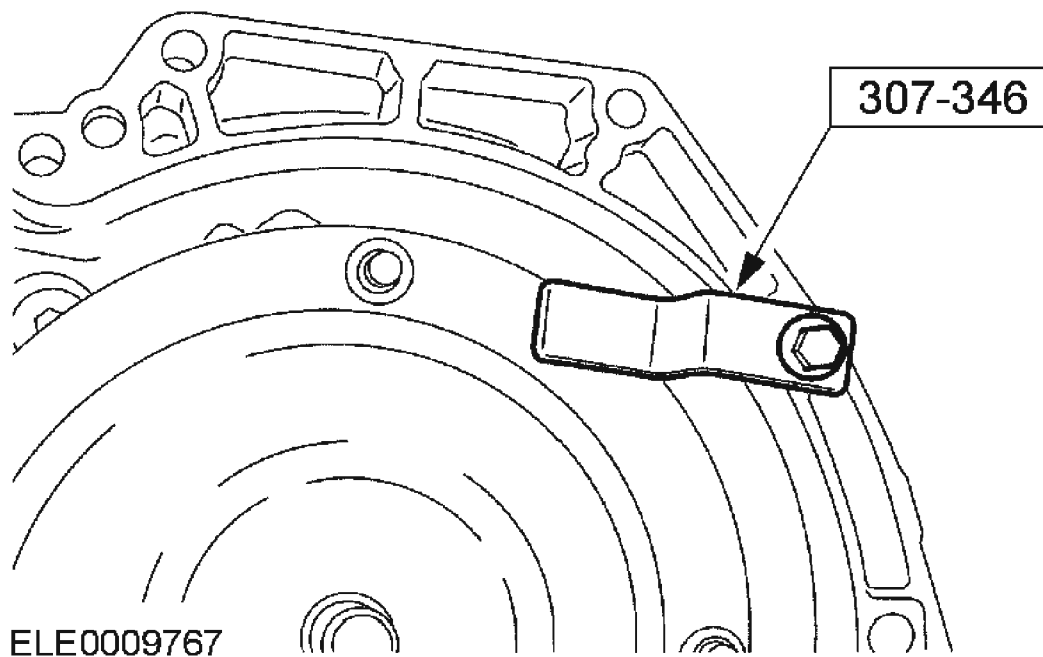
Installing Special Tool (307-346) To Torque Converter
